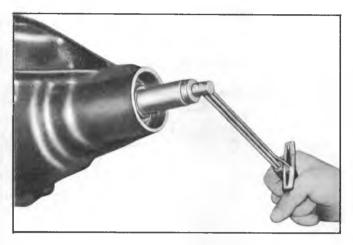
B-Measuring Drive Pinion Bearing Rotating Torque
